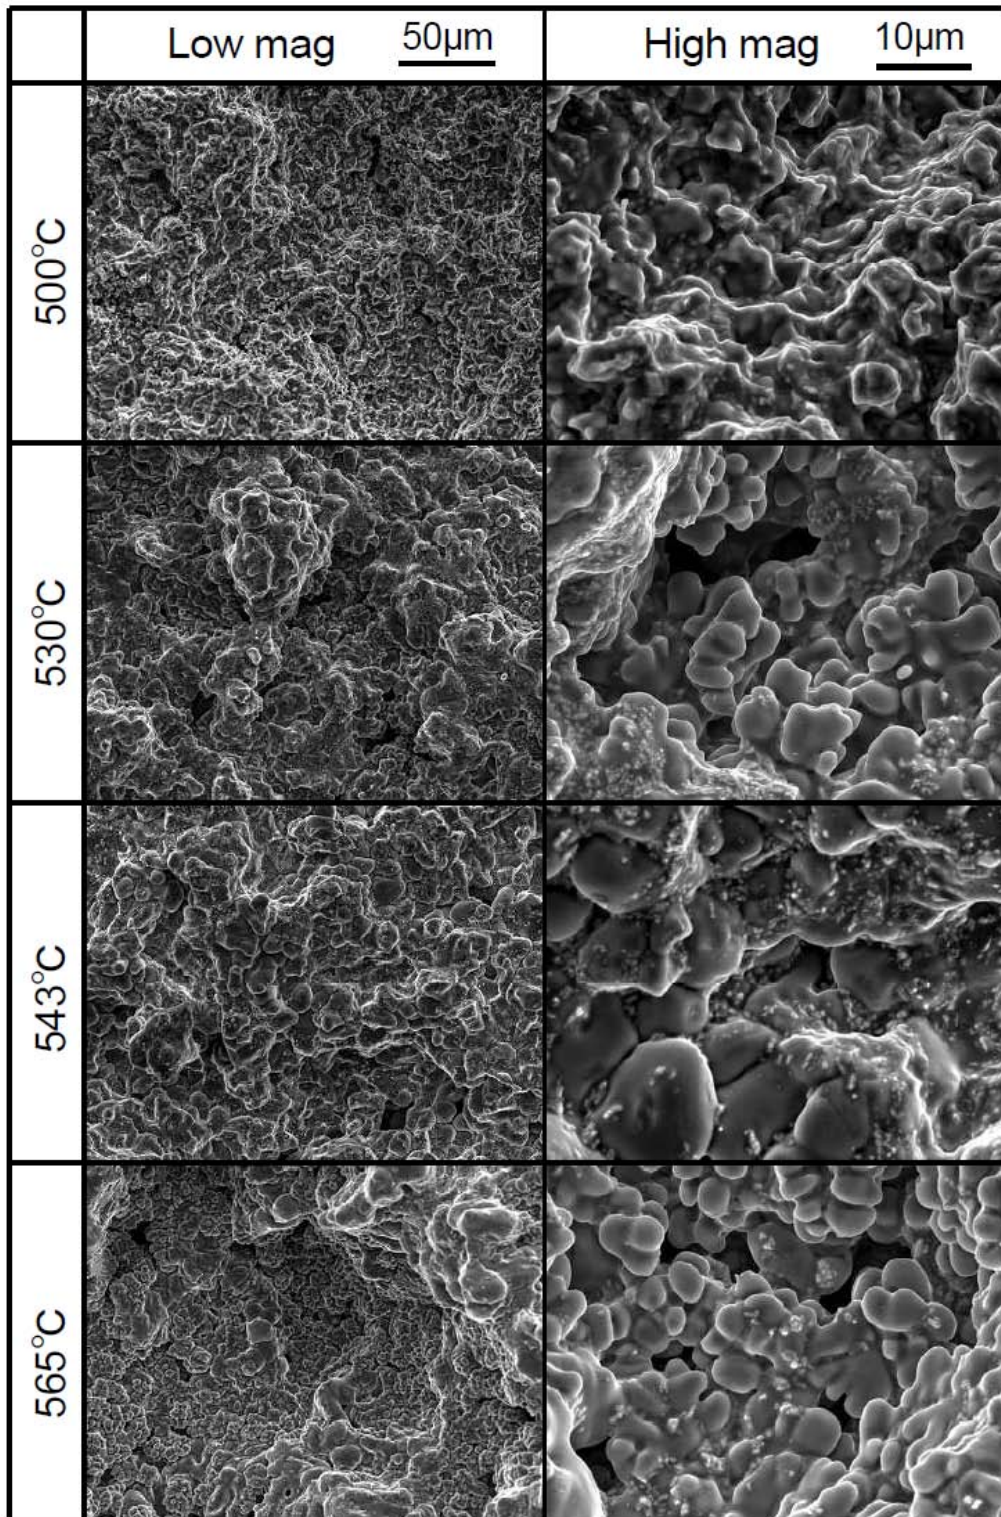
(b) SEM images of fracture surface for Al-Ca-RE magnesium alloy.
